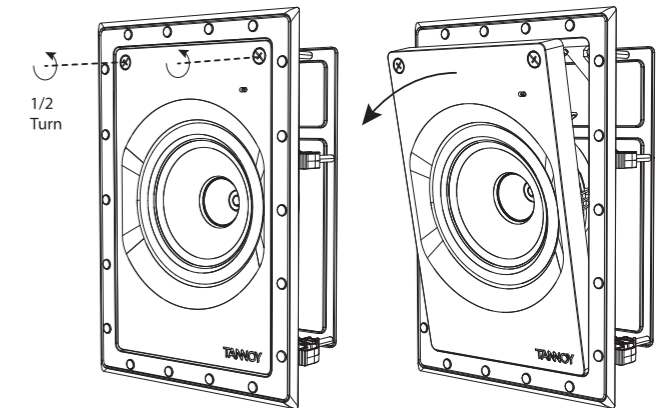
Removing the Loudspeaker Assembly from the Frame
